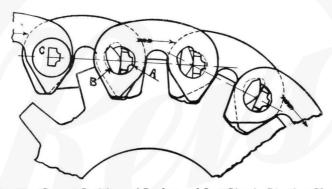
Correct Positions of Rocker and Seat Pins in Riveting Chains.
